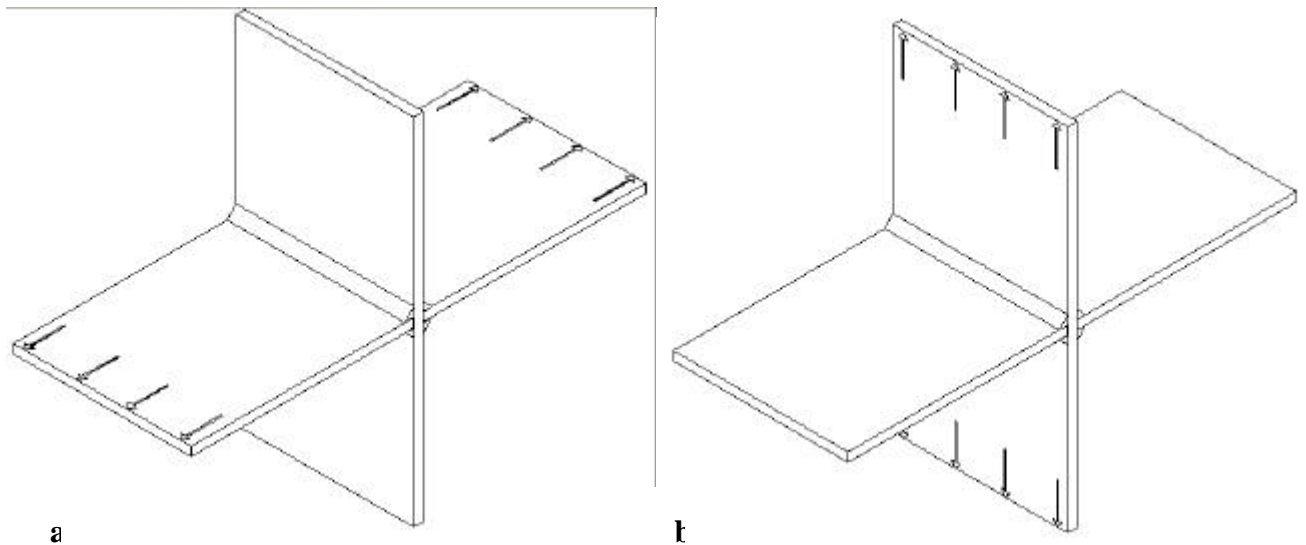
(a) non-load-carrying fillet welded joint, (b) load-carrying fillet welded joint
